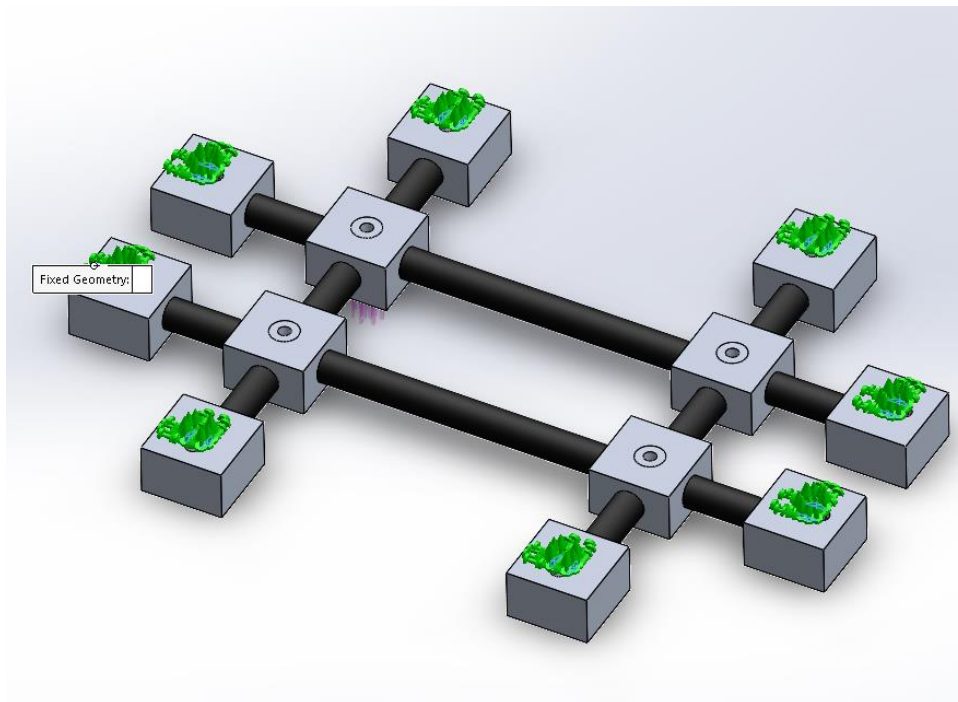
shows the fixtures of the CAD model. The bottom of the aluminium holding block was defined as the fixtures because these eight holding blocks were secured tightly during the experiments. The eight aluminium holding blocks were secured by screws and washers during the physical tests, as shown in figure 4. The actual fixing points should be around the bolt hole area. Defined the entire bottom surface eliminates all the deformation of the holding blocks, affecting the simulation results' strain behaviour. A refined fixture definition had been established. Figure 4 shows the fixture of the new CAD model fixture arrangement. The fixtures were defined on the eight holding blocks. Screws and washers secured the eight aluminium holding blocks during the physical tests. The 'split line function' created the washer area around the bolt holes on each holding block.
